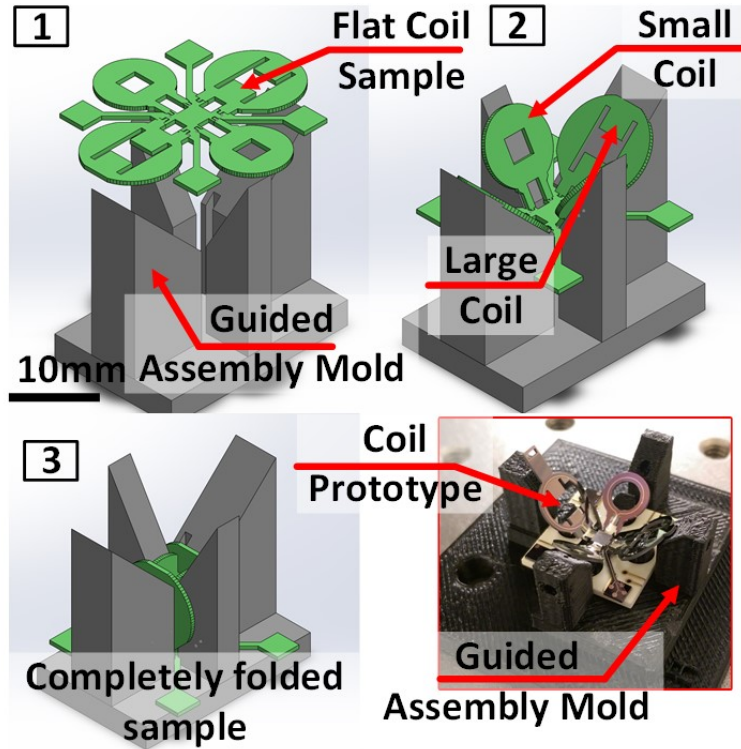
Sketch of the guided assembly process of the folded Helmholtz coils using a pre-defined mold, insert: a picture of a coil's sample inside a folding mold prototype created using 3D printing
